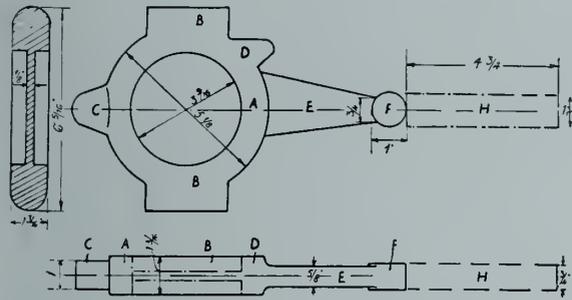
Eccentric cam, workpiece for which forging schedules are discussed.
